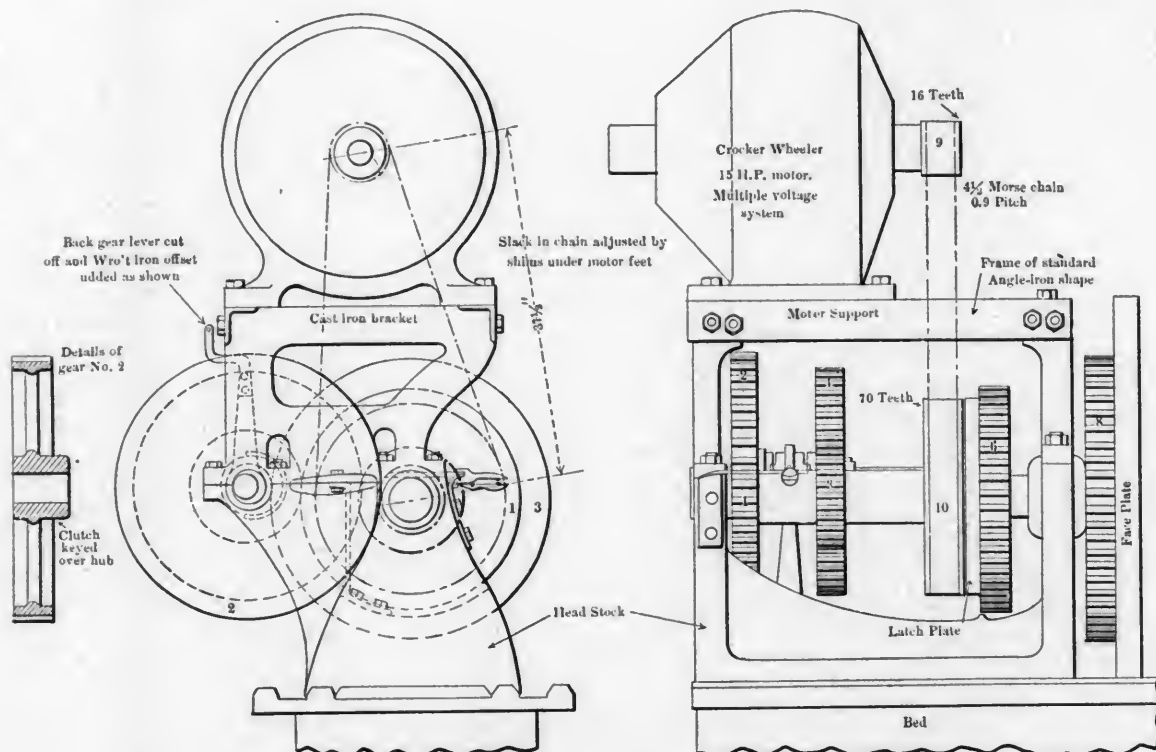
METHOD OF MOUNTING THE MOTOR UPON THE 42-IN. NILES TRIPLE-GEARED LATHE.
